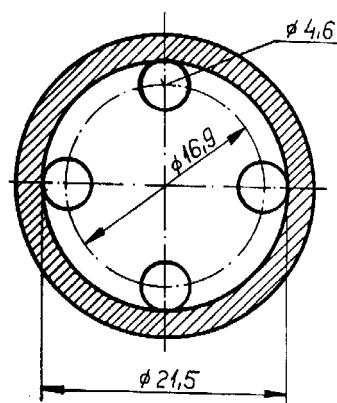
Valve body of rubber spring valve of self drinker type SZI with original holes
